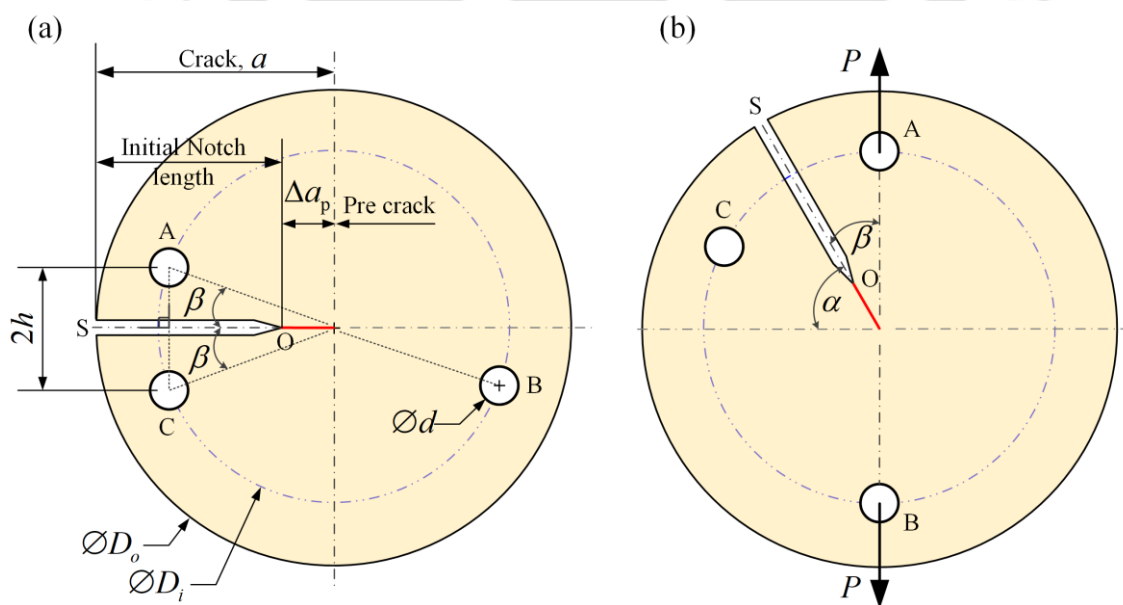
Geometry of the proposed SECC specimen and its loading configurations: (a) details of the specimen. (b) Specimen orientation for conducting the mixed mode (I/II) tests.
